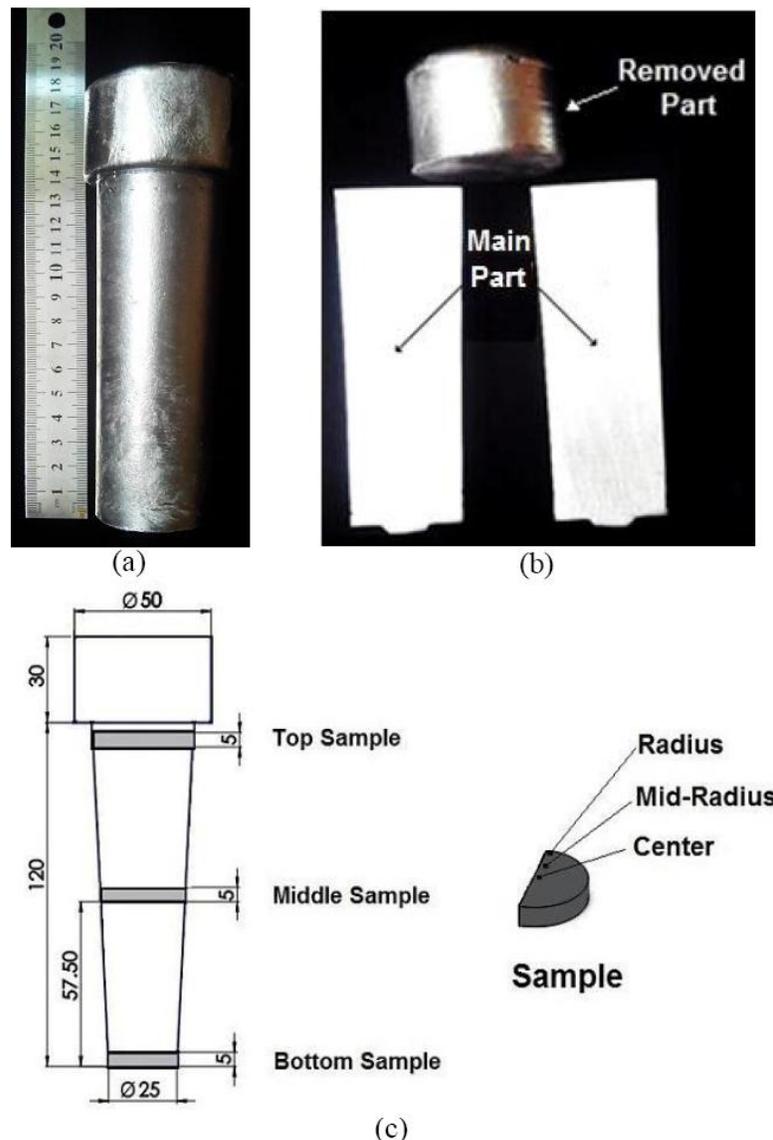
(a) A photograph of a sample ingot produced from the LSC process, (b) the ingot after removing the upper part and sectioning the remaining part into two half; (c) a schematic illustration of the ingot showing the main dimensions (in millimeters) and the position of metallographic samples
